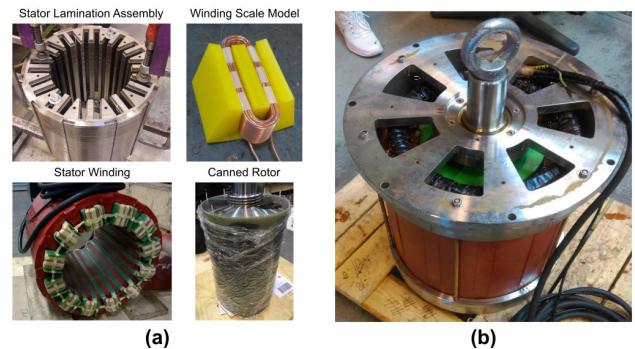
(a) Prototype machine parts and (b) prototype machine assembly.
